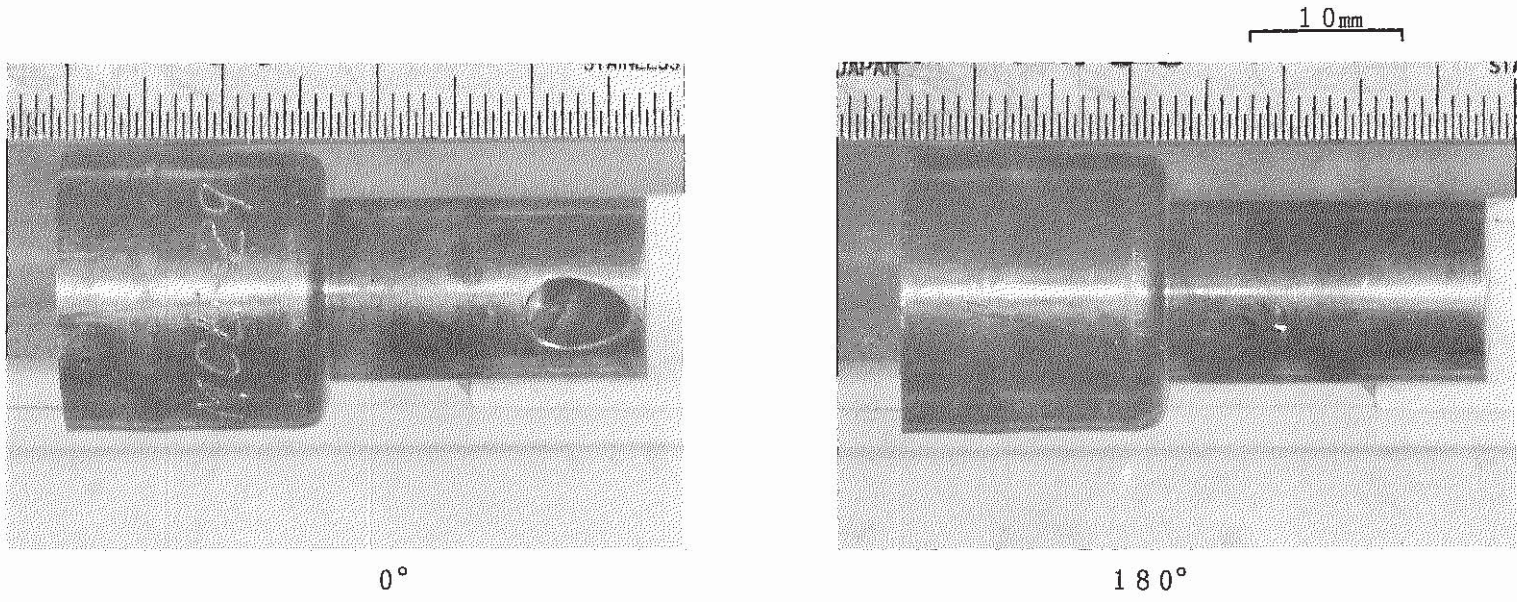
View of Irradiated End Plug(Peripheral Pin)
